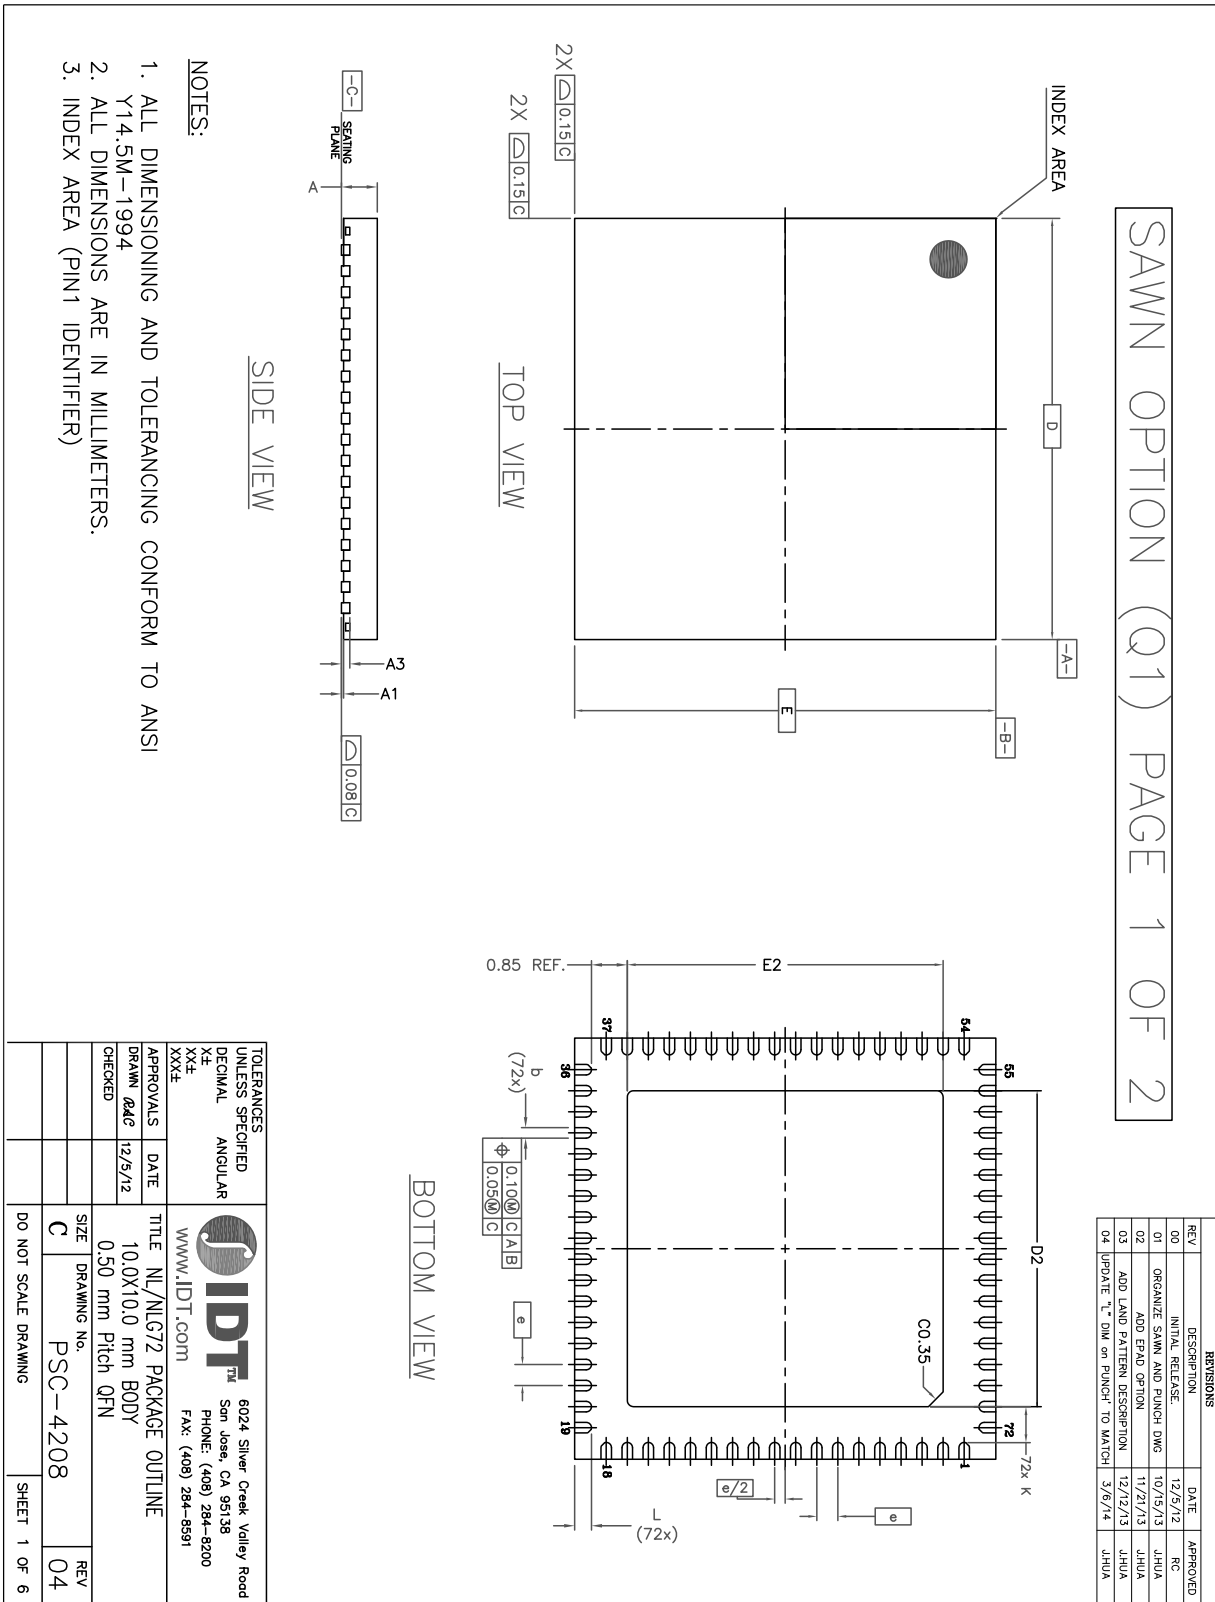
72-Pin QFN Package Outline Page 1 (SAWN Option)
